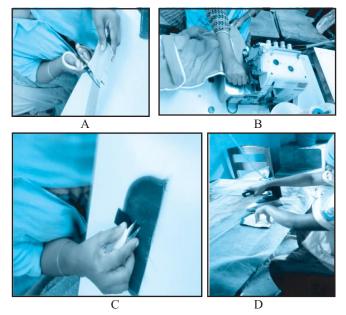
The Cutting operator (A, B) sewing operator (C) and ironer (D).
